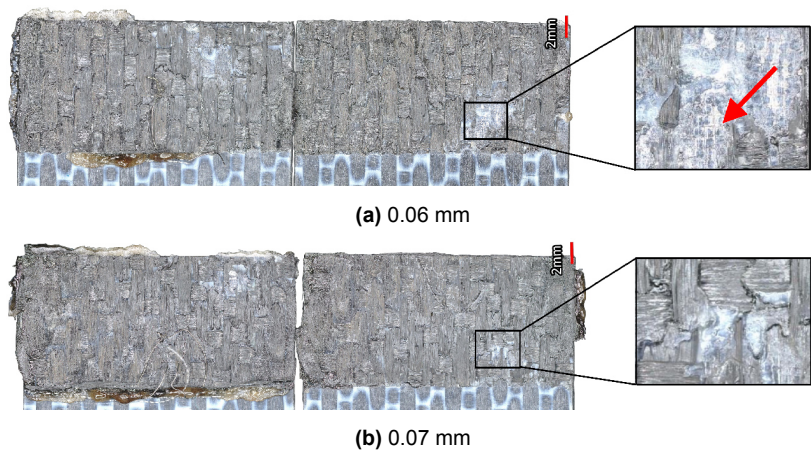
Close up view of fracture surfaces welded at different vertical sonotrode displacements
